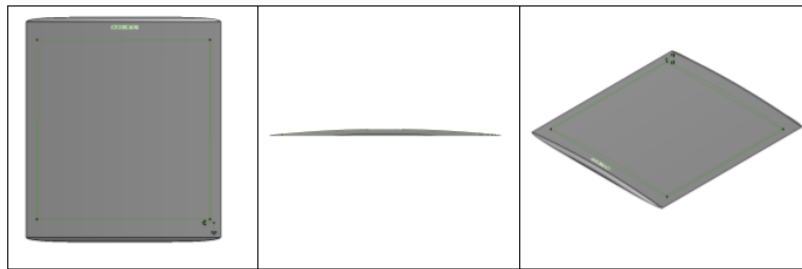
CMD-TP-RAPM-017-501 top view (left), front view (middle), isometric view (right)
